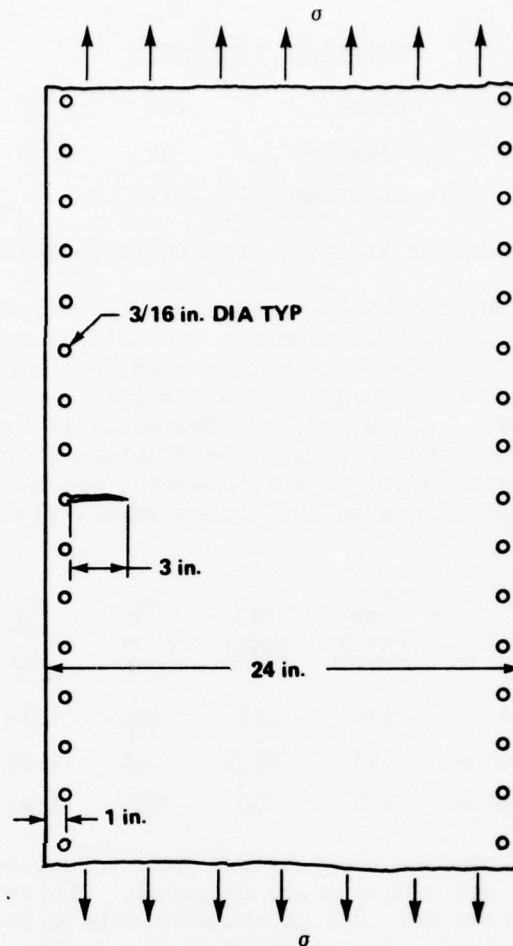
Crack growing from an edge rivet hole.
